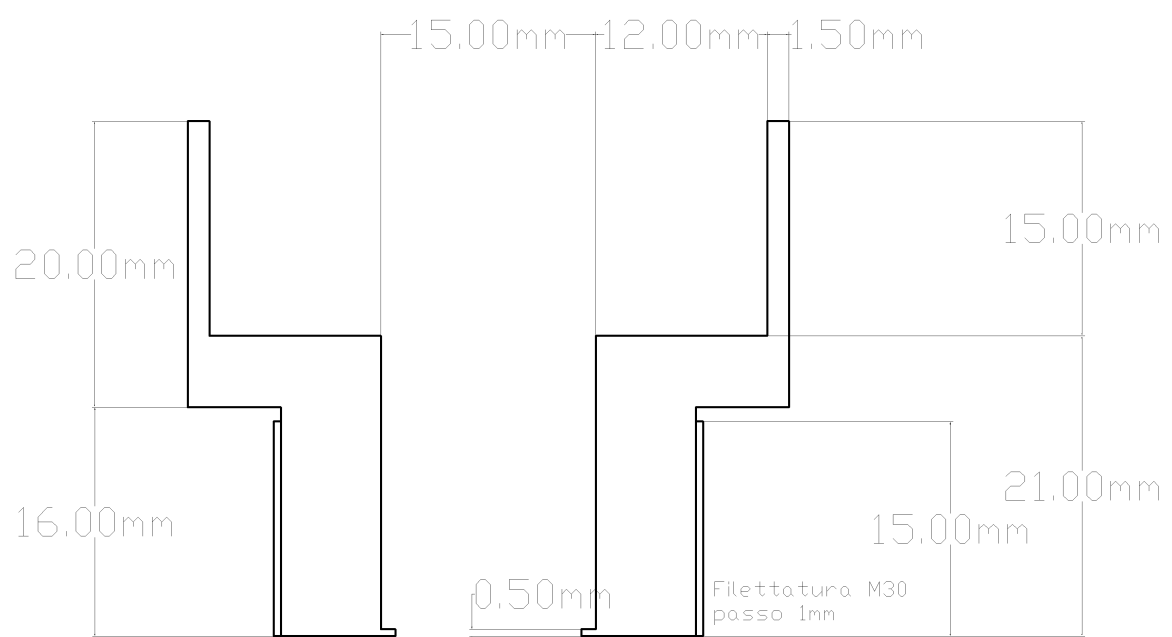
Mechanical support of the collimating lens. Section of the piece to be realized on a lathe.
